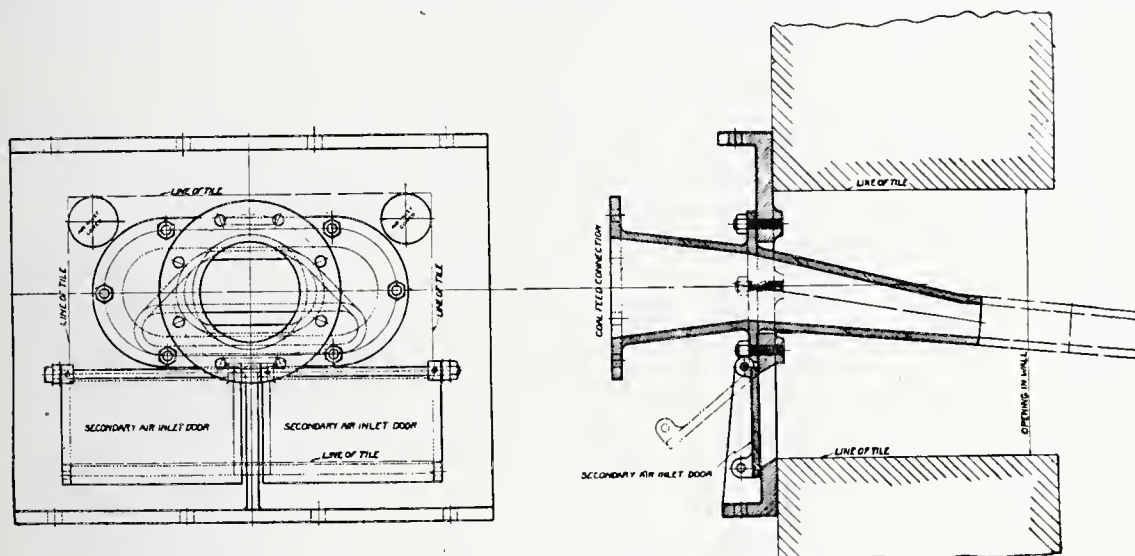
Front Elevation and Section of Fuller Horizontal Type Burner.
